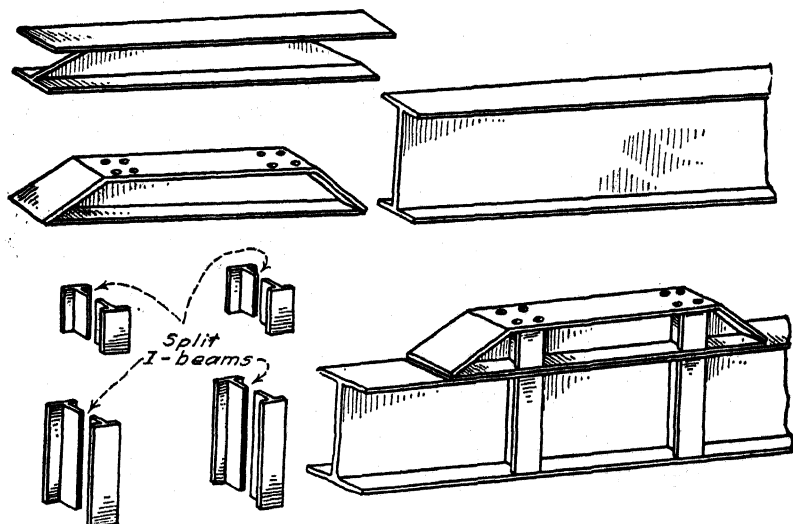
Where loads are heavy and substantial column support is required, this design is effective and economical. The top member is made from an I beam with the web cut as shown. The stiffeners are smaller I beams split down through the web.
